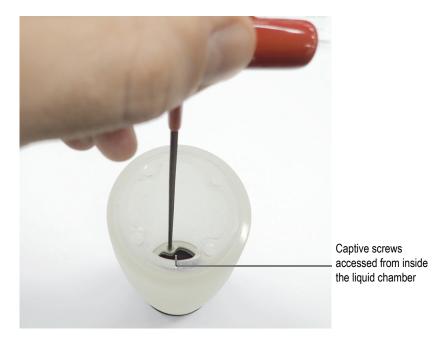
Accessing the captive screws of the flange with the liquid-control valves from inside the liquid chamber
